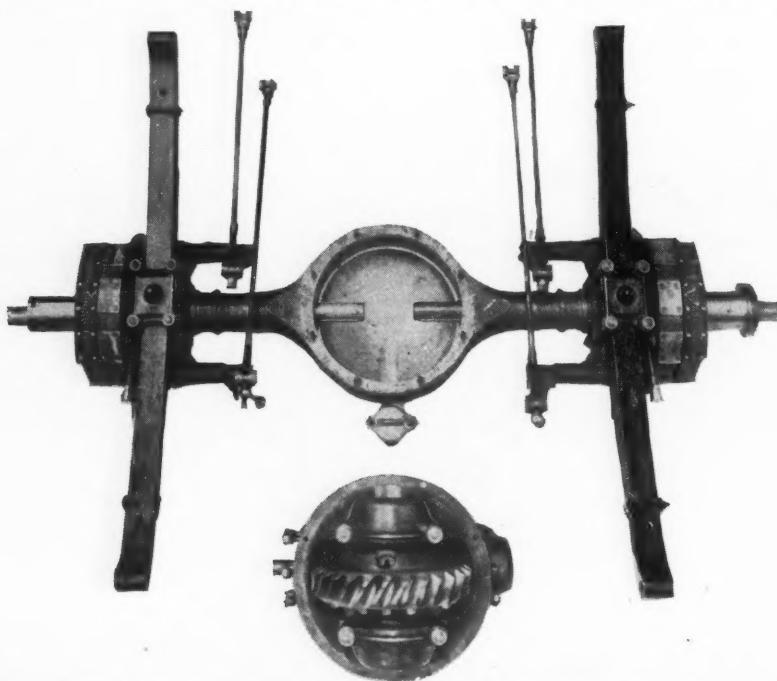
The Component Parts of the Wells Back Axle When Dismounted
